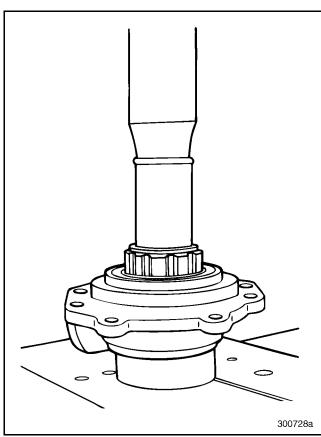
Installing Main Drive Pinion Assembly into Drive Pinion Bearing Cover
